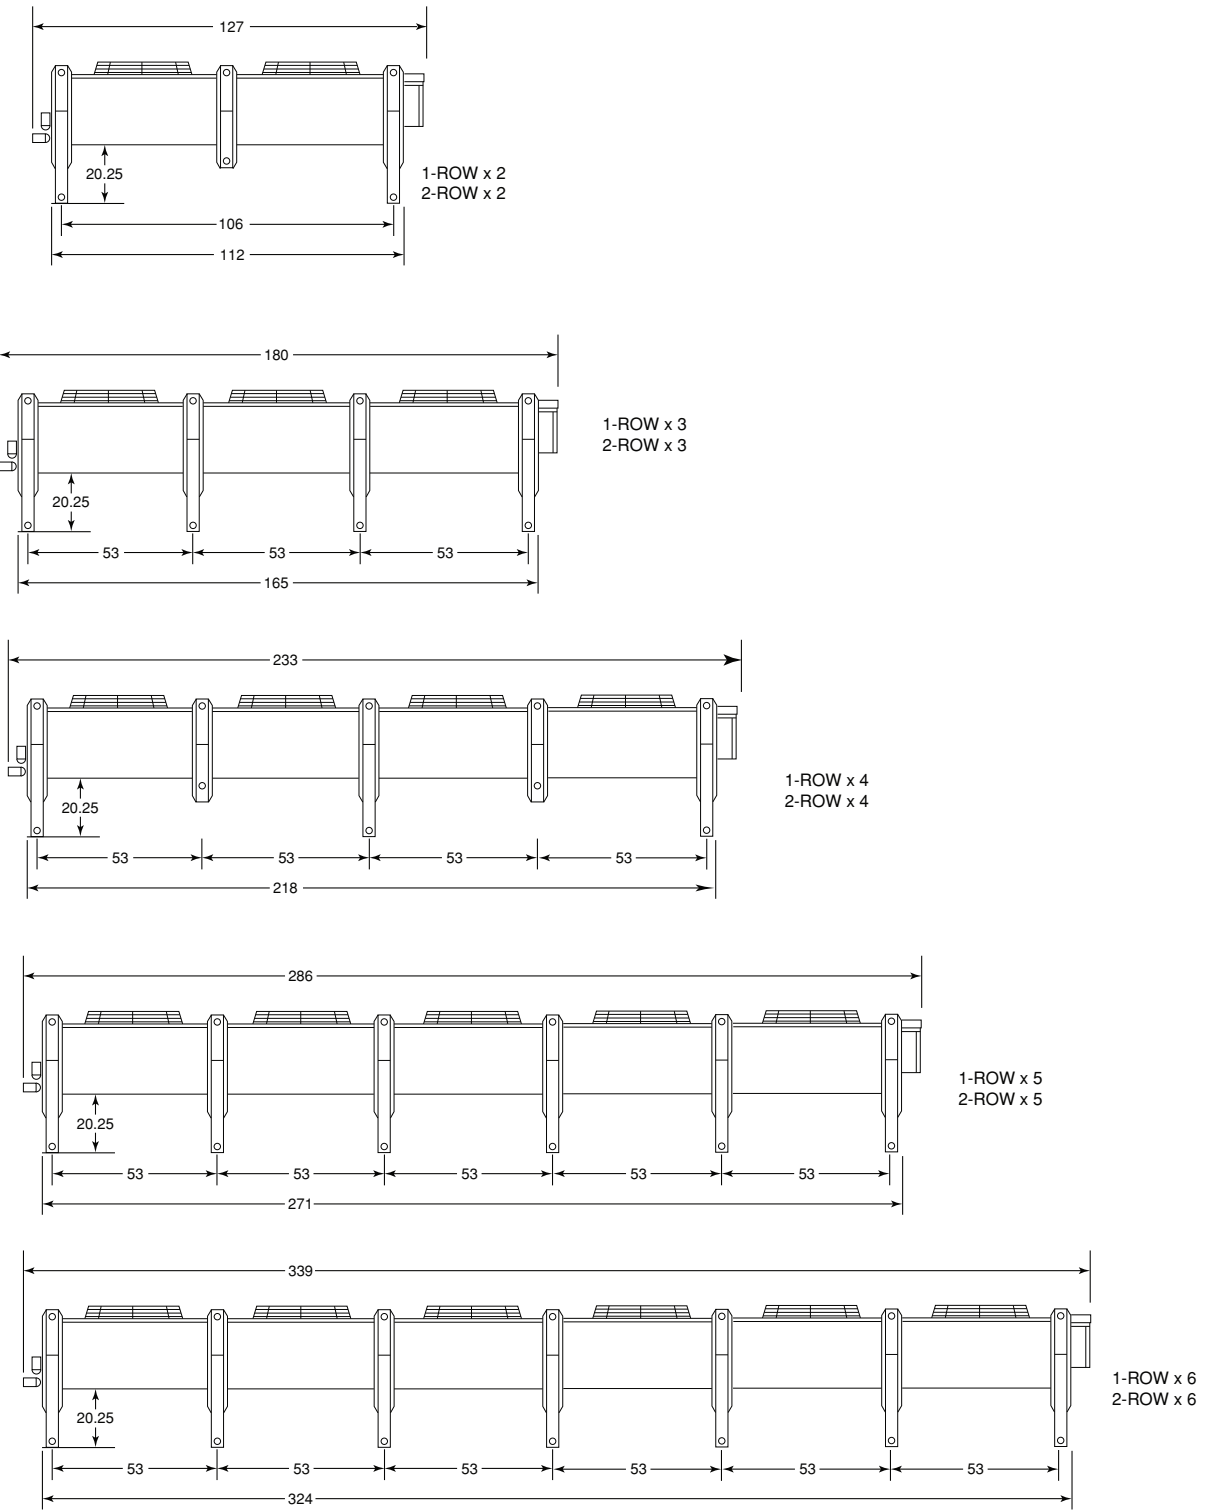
PoolPak Air Cooled Condenser Side views
